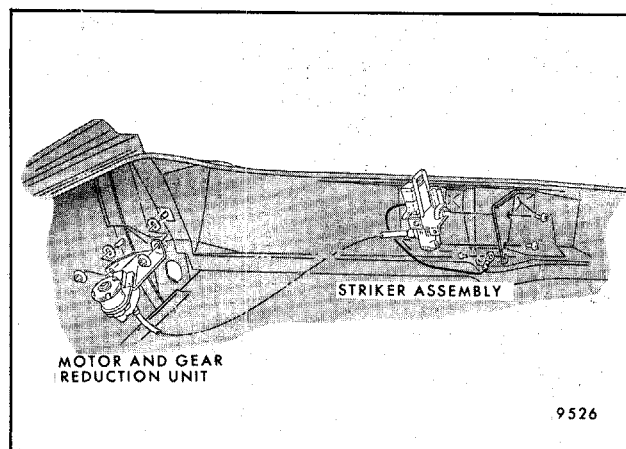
Typical Cadillac "C, K" Style Closing Unit
